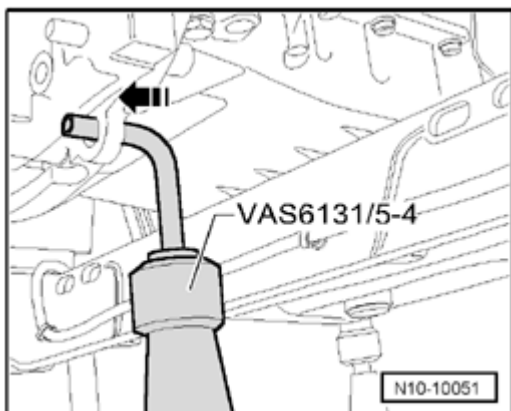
Inserting Angled Locating Pins Of Rear Engine Mount Into Bolt Hole From Engine Side
